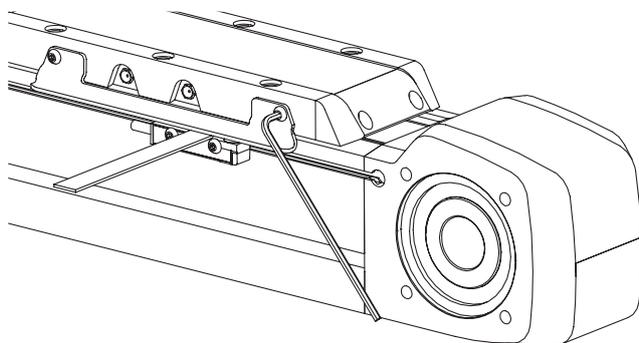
Setting the switching distance with a feeler gauge, and tightening the bolts
